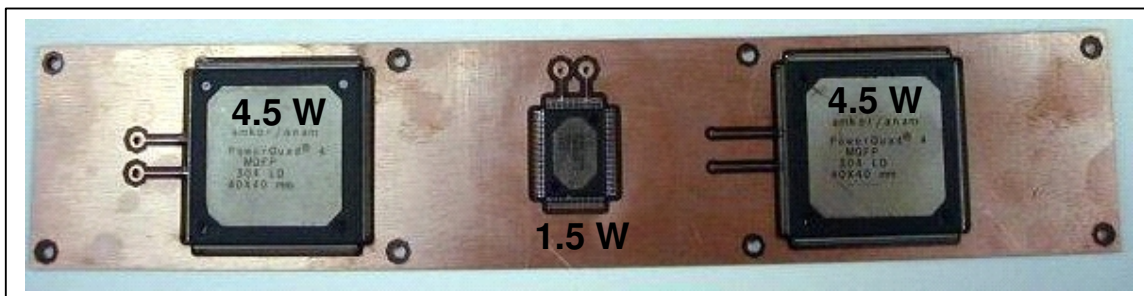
Thermal Test Chips, Two Big, One Small, Soldered to PCB
